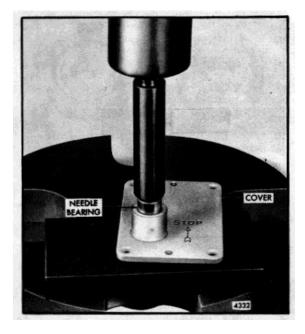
Installing Needle Bearing in Governor Cover using Tool J 21068
